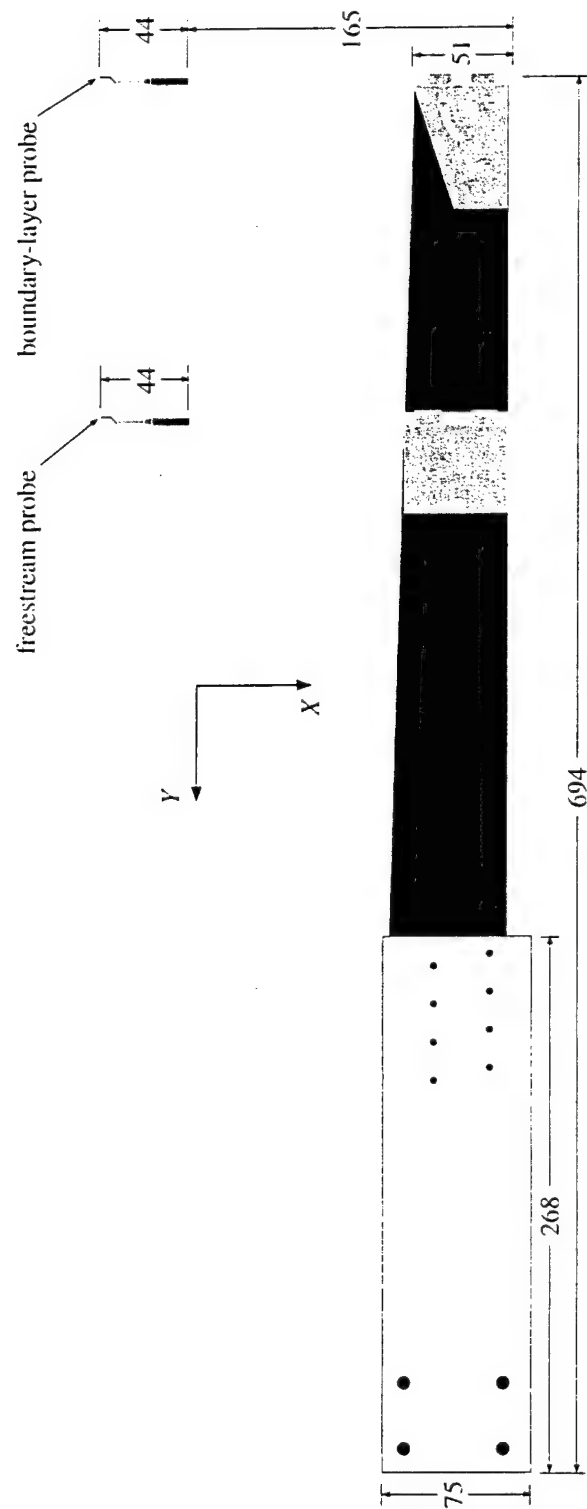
Top view of the hotwire sting. All dimensions in millimeters.
